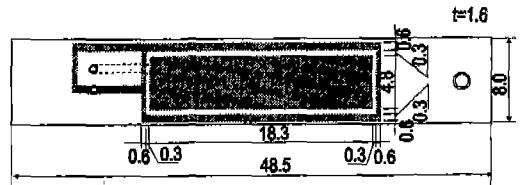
Detail geometric dimensions of the gap sensor plate(unit:mm)
